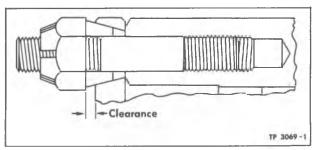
Clearance Between Axle Shaft Flange and Stud Nut
